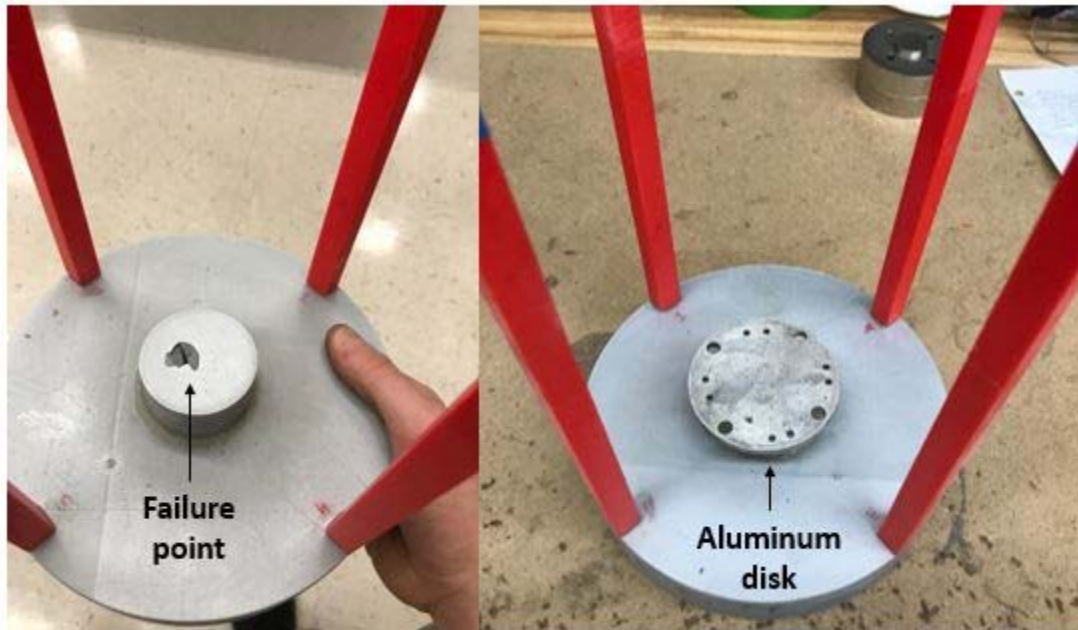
Damaged piston stopper (Left) and aluminum disk fix (Right).
